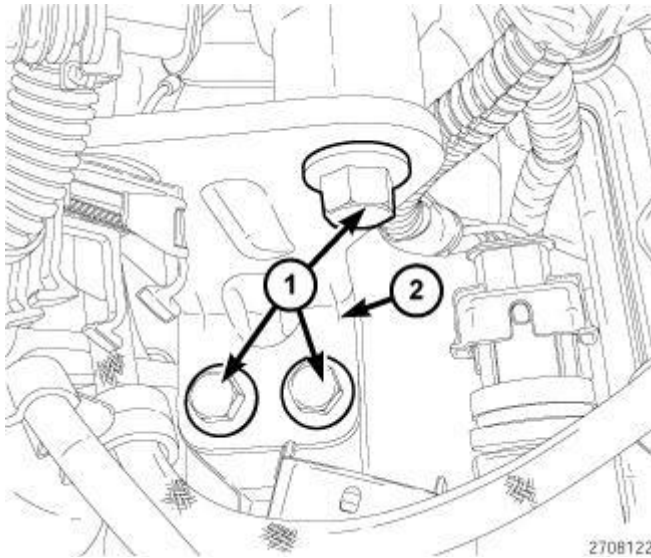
GENERATOR BRACKET SUPPORT & BOLTS
